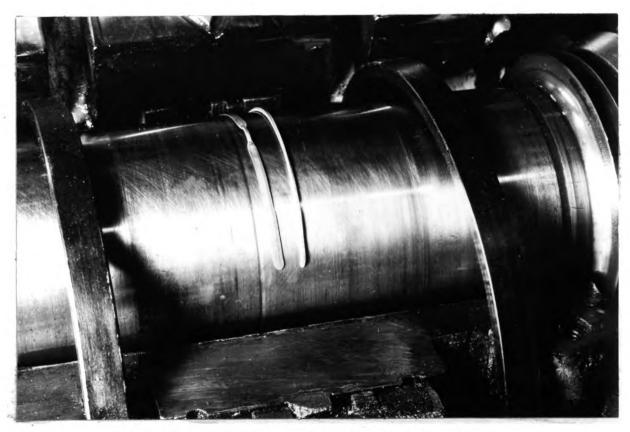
Lead Wires Before and After Crushing for Clearance Measurement.
